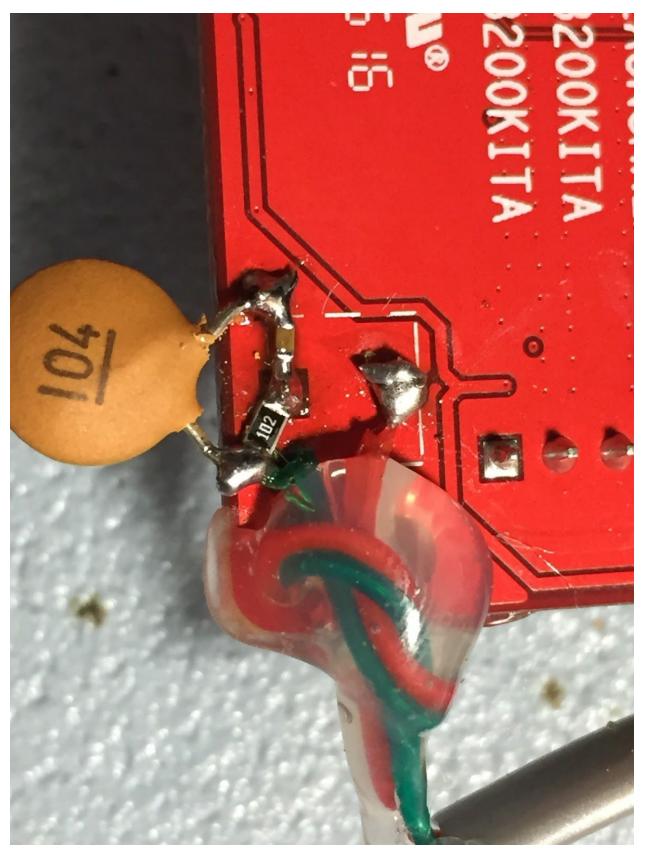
RC filter components were added to the bottom side of the PCB ion the SW3 area.
